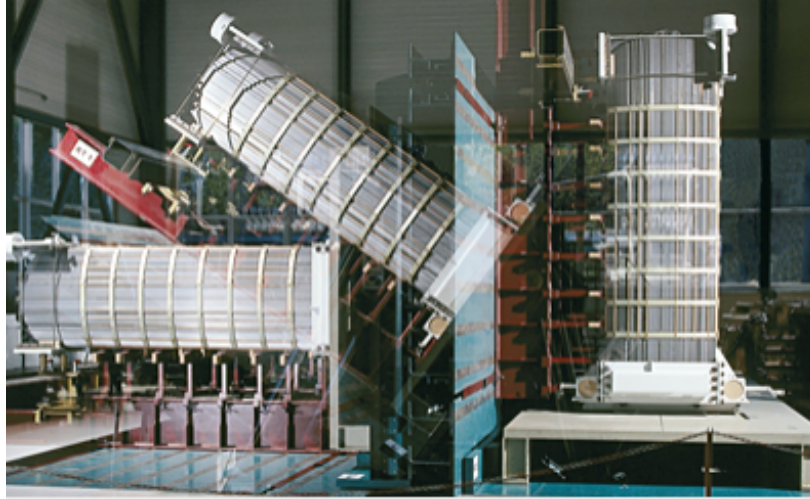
Lifting the core into upright position using special equipment [35].
